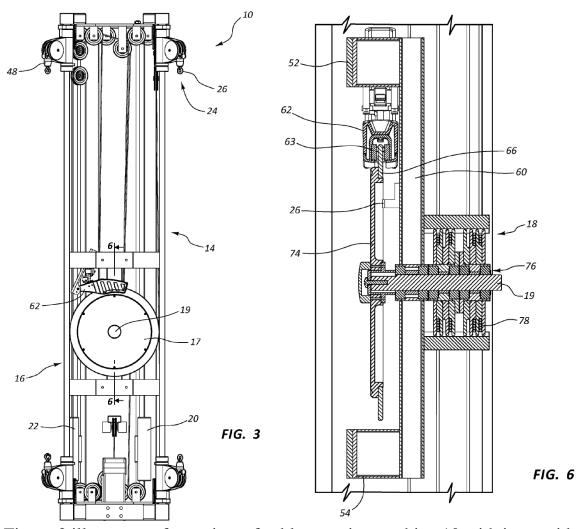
illustrates a front view of cable exercise machine 10 with its outside cover removed. *Id.* at 4:28–29, 6:19–22. Figure 6 is a cross sectional view of the resistance mechanism of cable exercise machine 10. *Id.* at 8:31–32.
